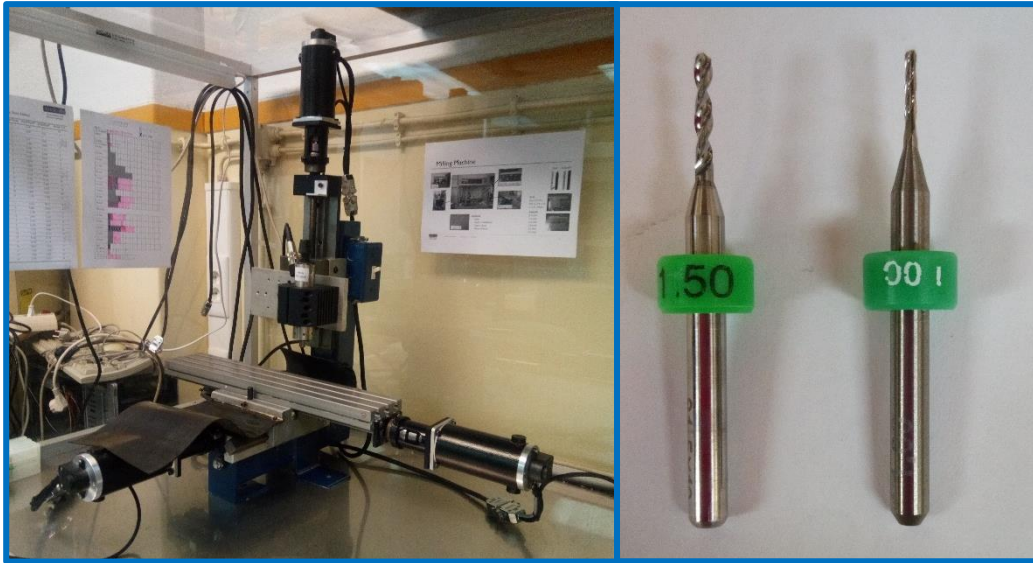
On the left, the Milling Machine employed to produce the mesochannels, On the right, the drill bit and mill bit employed in drilling and milling (1.5 mm and 1.0 mm respectively)
